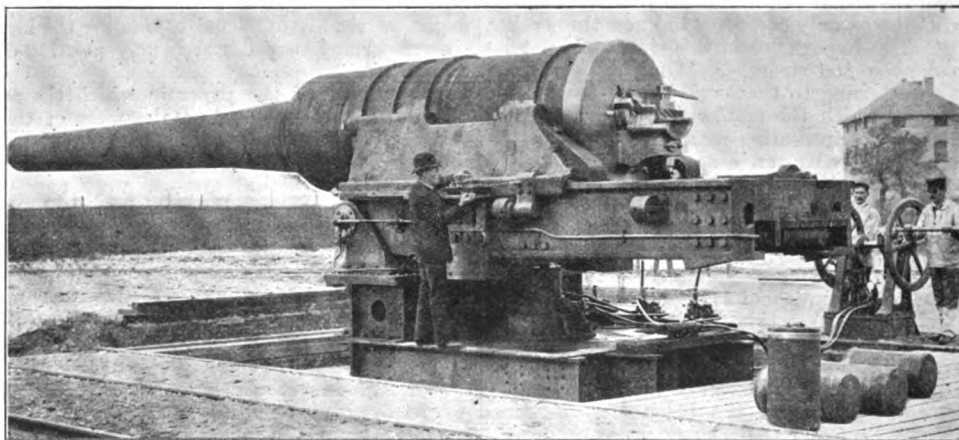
34-CENTIMETRE (13.386-IN.) NAVAL GUN AND MOUNTING.
